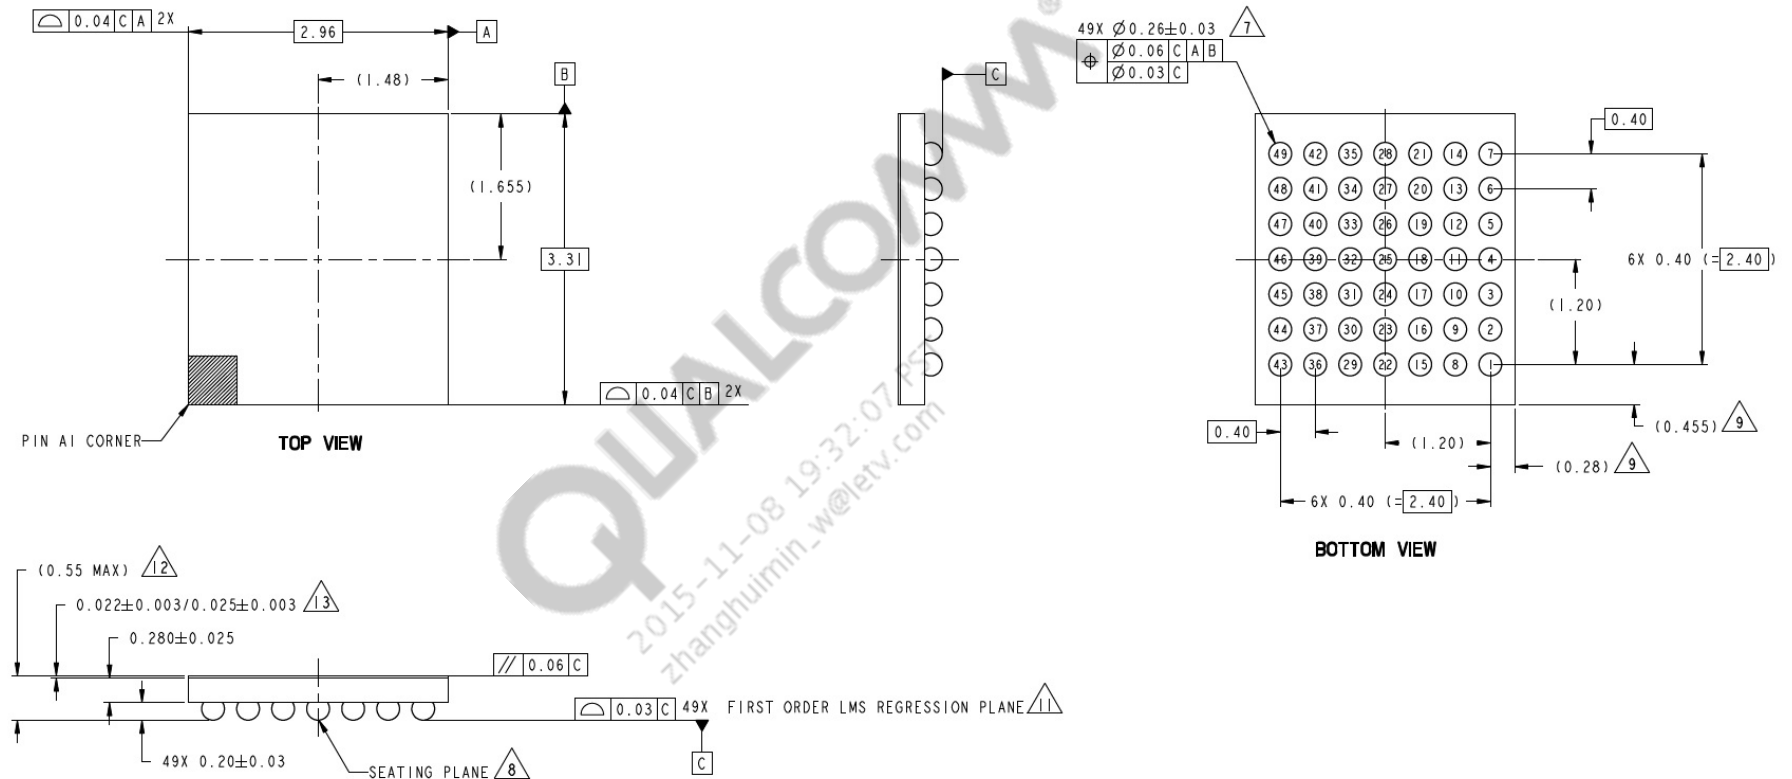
49WLNSP 2.96 × 3.31 × 0.55 mm package outline drawing
